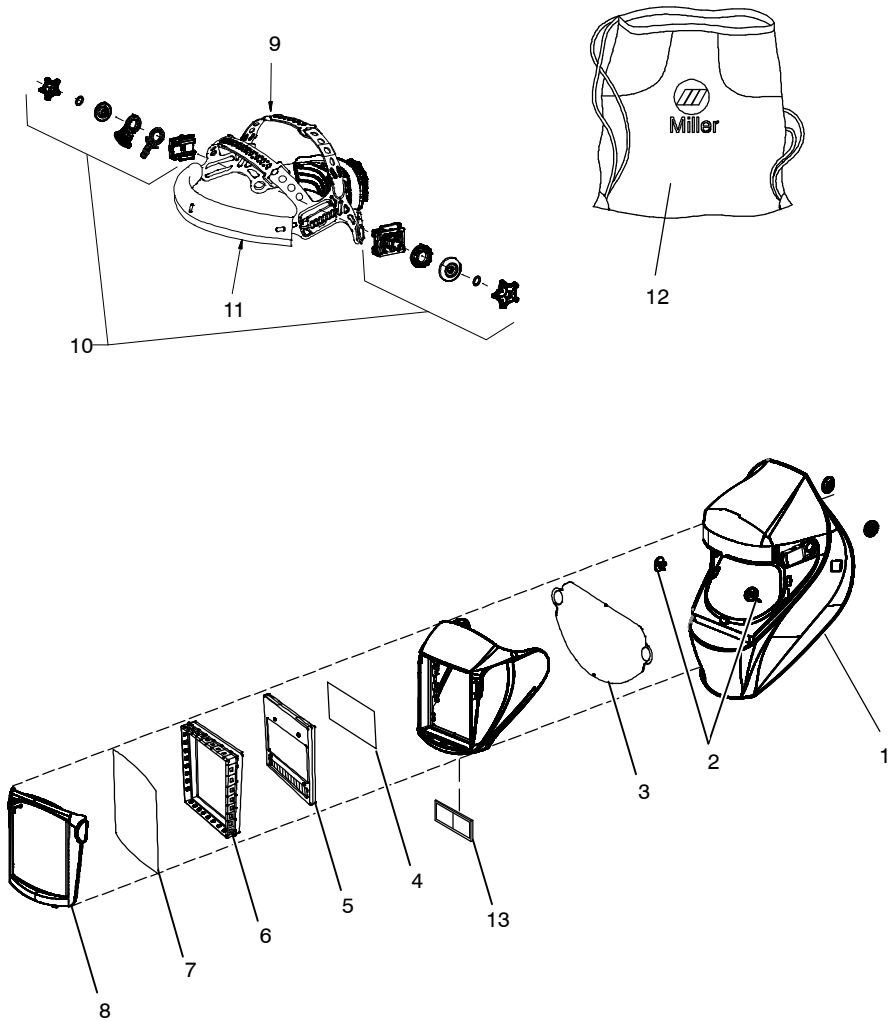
Titanium 9400i Auto-Darkening Welding Helmet
